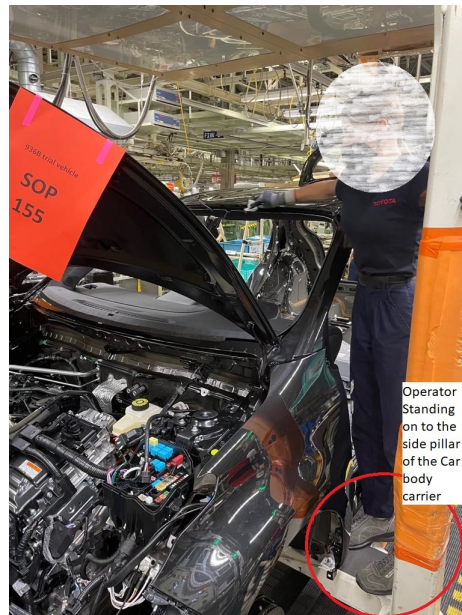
Operator standing on the side pillar of car body carrier ready to wipe the body flange surface.[57]
